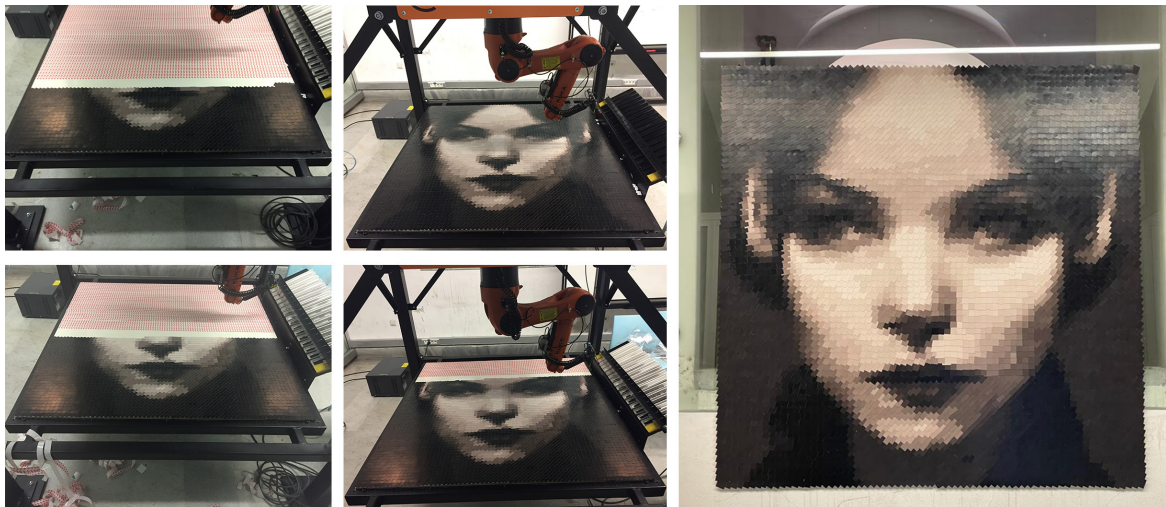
WasteWorks – Assembling AI-generated art with a robot arm using waste material, e.g., old paper cards received from a printing manufacturer.
